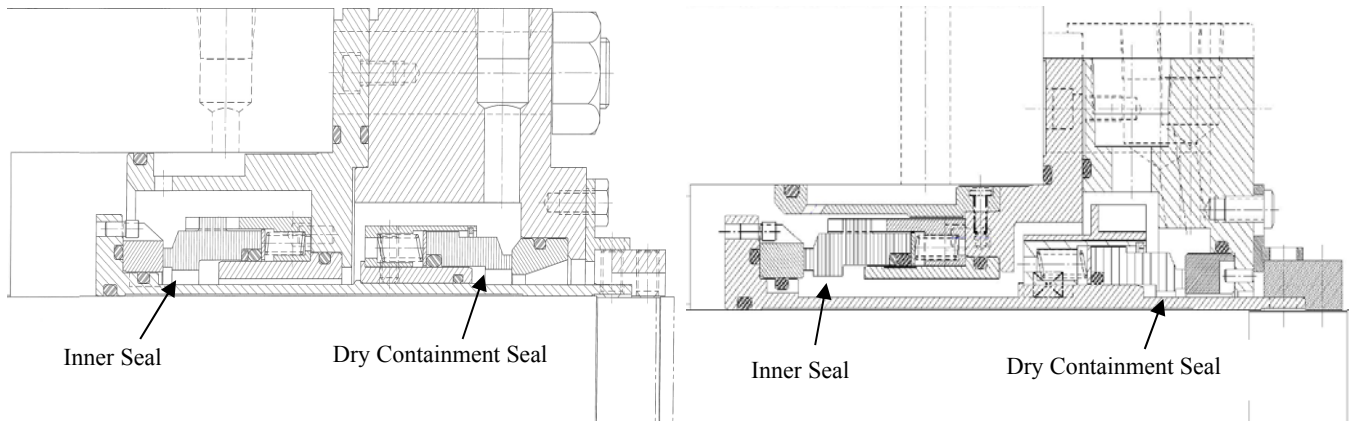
2CW-CS Type A with API Piping Plan 11 / 75 (left); 2CW-CW Type A with API Piping Plan 11 / 52 (right)
